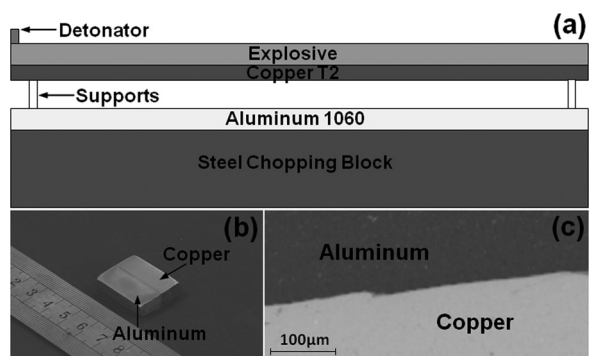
(a) Sketch of the explosive welding technique. (b) Optical graph showing the Cu-Al weldment prepared by the explosive welding technique. (c) SEM micrograph of the interface which shows a straight morphology.
